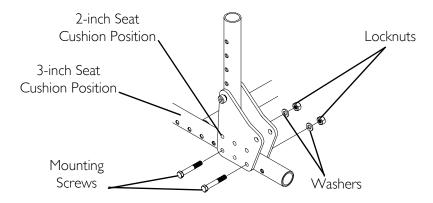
Adjusting the Back Height - Recliner Models Only
